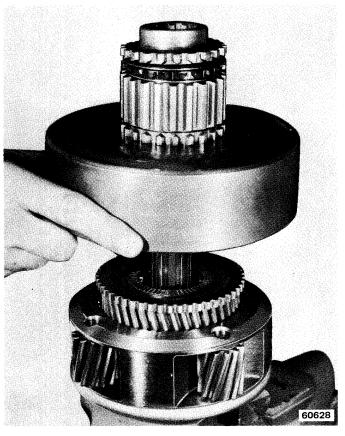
Removing Sleeve, Hubs, and Ring Gear Assembly
